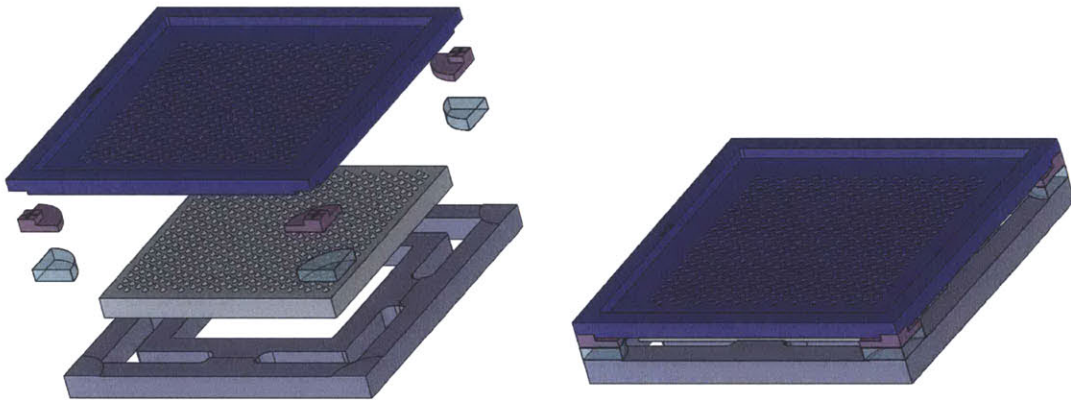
CAD drawing of iEPS showing structure, emitter array with 480 tips, and extractor grid.
